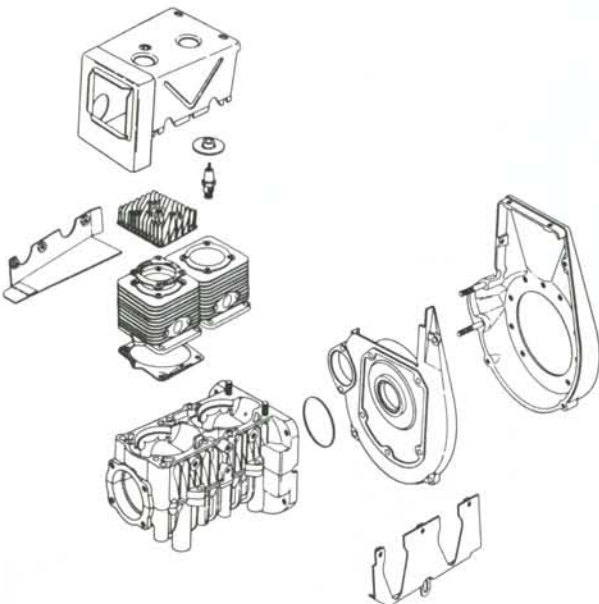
Exploded view of major housing components used on centrifugal fan models.
